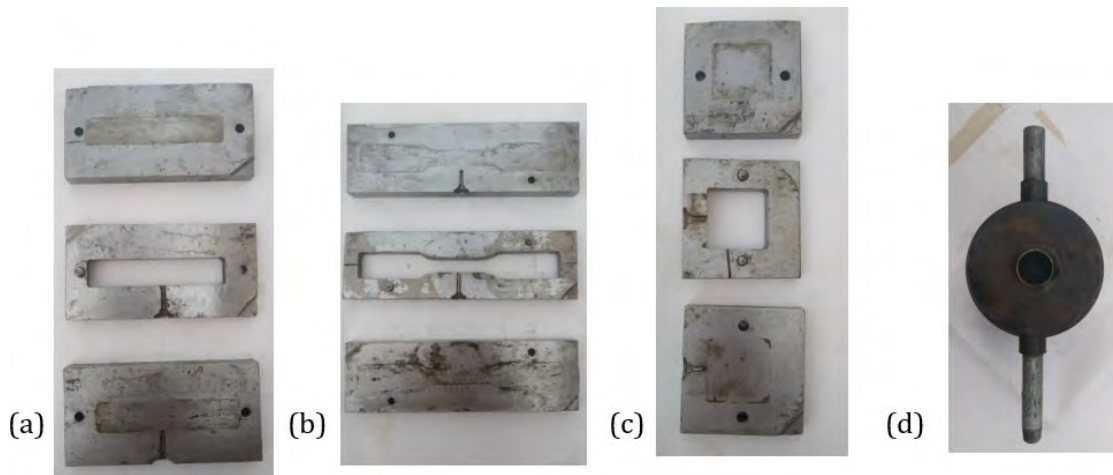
Molds for samples: (a) flexure mold, (b) tensile mold, (c) shear mold, (d) sizing mold for compression sample.
